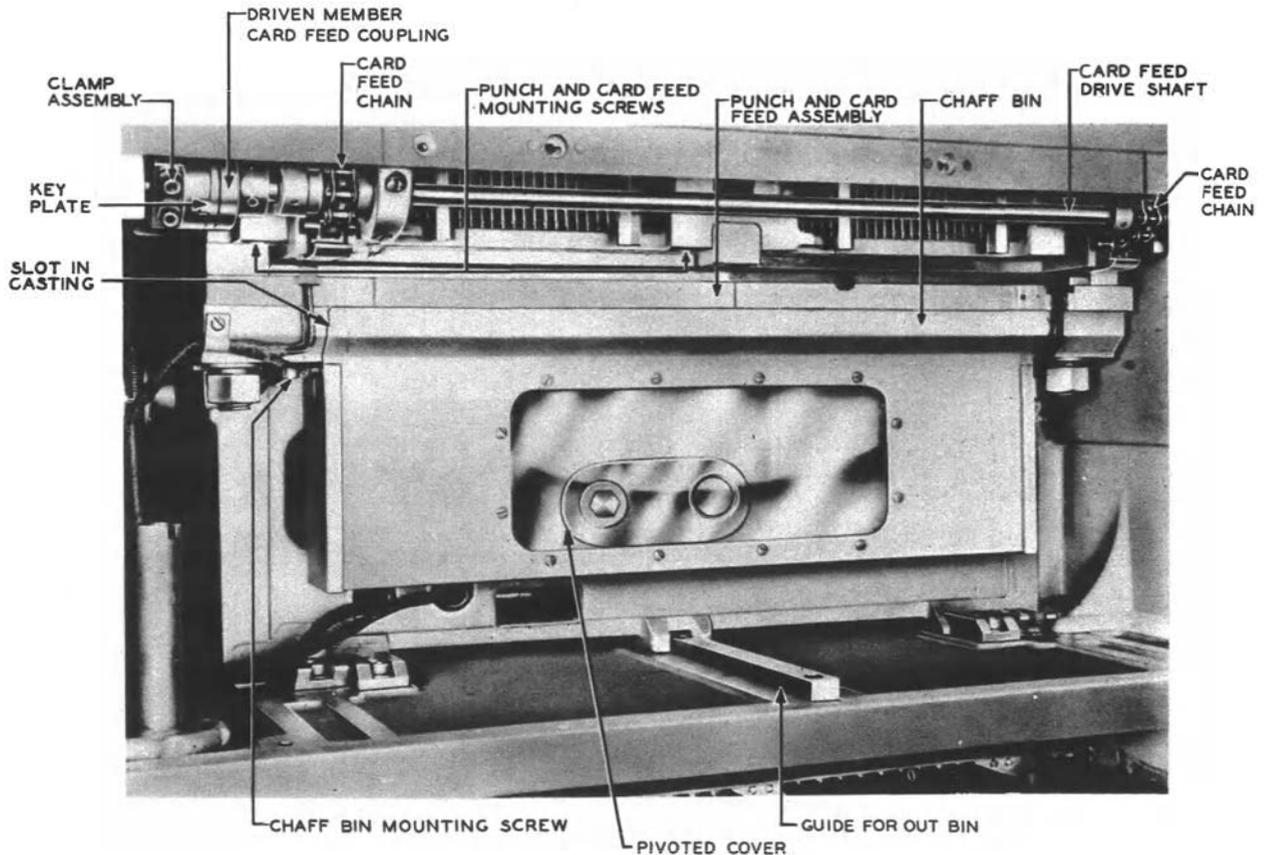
Punch and Card Feed Assembly Including Chaff Bin (Out Bin Removed)
